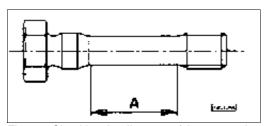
Checking the diameter of the connecting rod clamp bolts.
